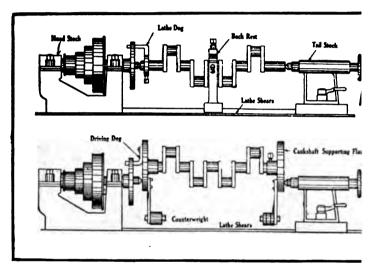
At A, Method of Supporting and Driving Cranksha Turning Main Bearings. At B, Showing Use of Crankshaft Sting Flanges when Machining Crank Pins.
